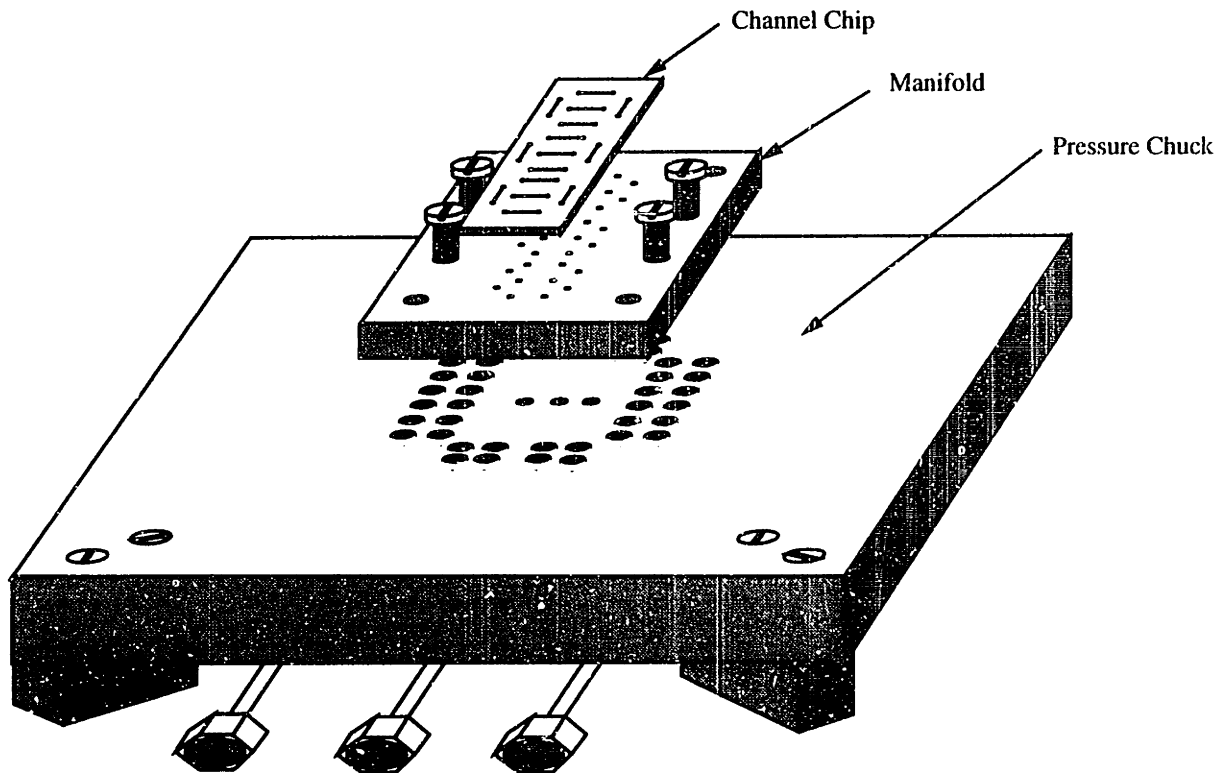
Exploded view of initial wafer chip and mounting hardware
